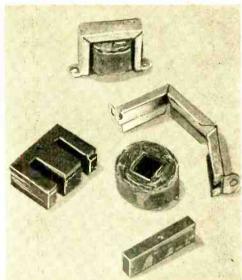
A transformer core and coil may be separated, if necessary, for making visual checks.
